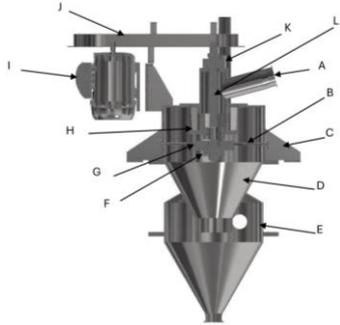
Main Components of an Air Classifier. (A) Rotor Housing; (B) Stay Bolt; (C) Upper Chamber; (D) Inner Cone; (E) Lower Chamber; (F) Lower Bearing; (G) Stay Bolt Ring; (H) Rotor Cage; (I) Electric Motor; (J) Drive Components; (K) Upper Bearing; (L) Shaft.
